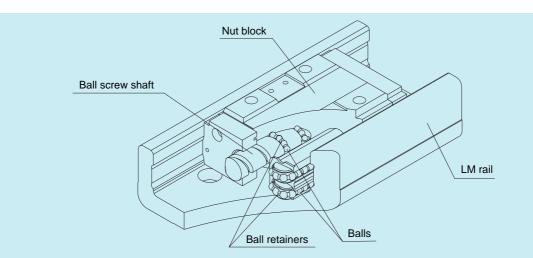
Construction of SKR-type LM Guide Actuator with Caged Ball Technology
